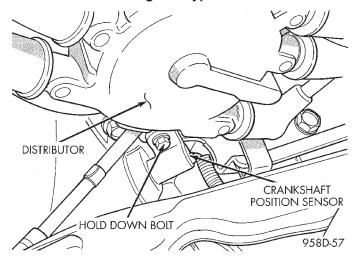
Crankshaft Position Sensor—2.5L Engine
